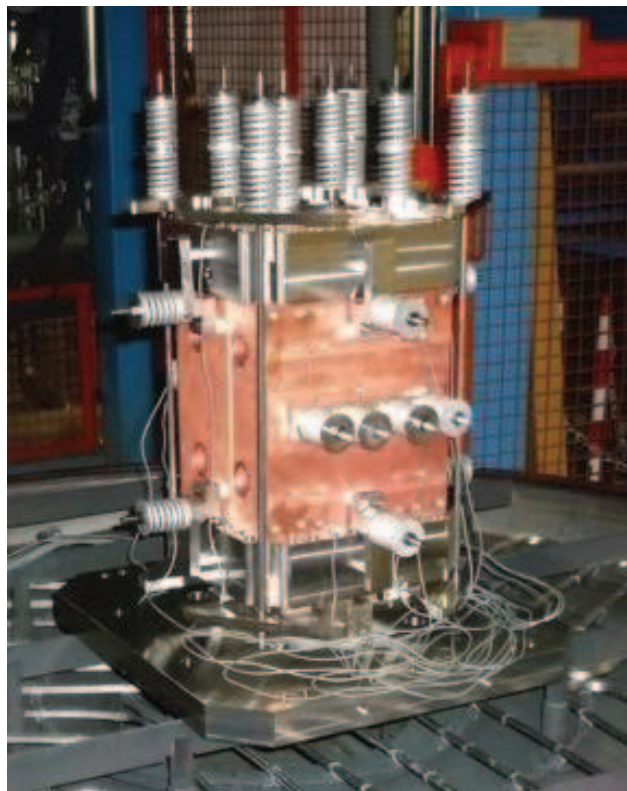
Assembly of the prototype on the LNL vacuum furnace
